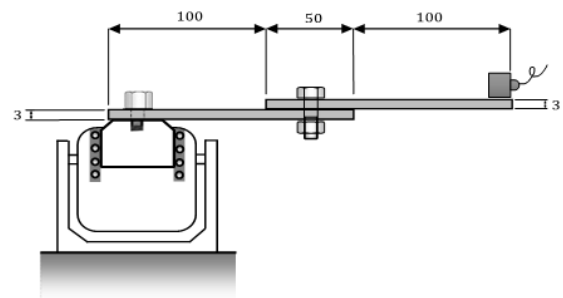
Schematic of Bolt Joints and Simple beam Dimensions in an Exciter
